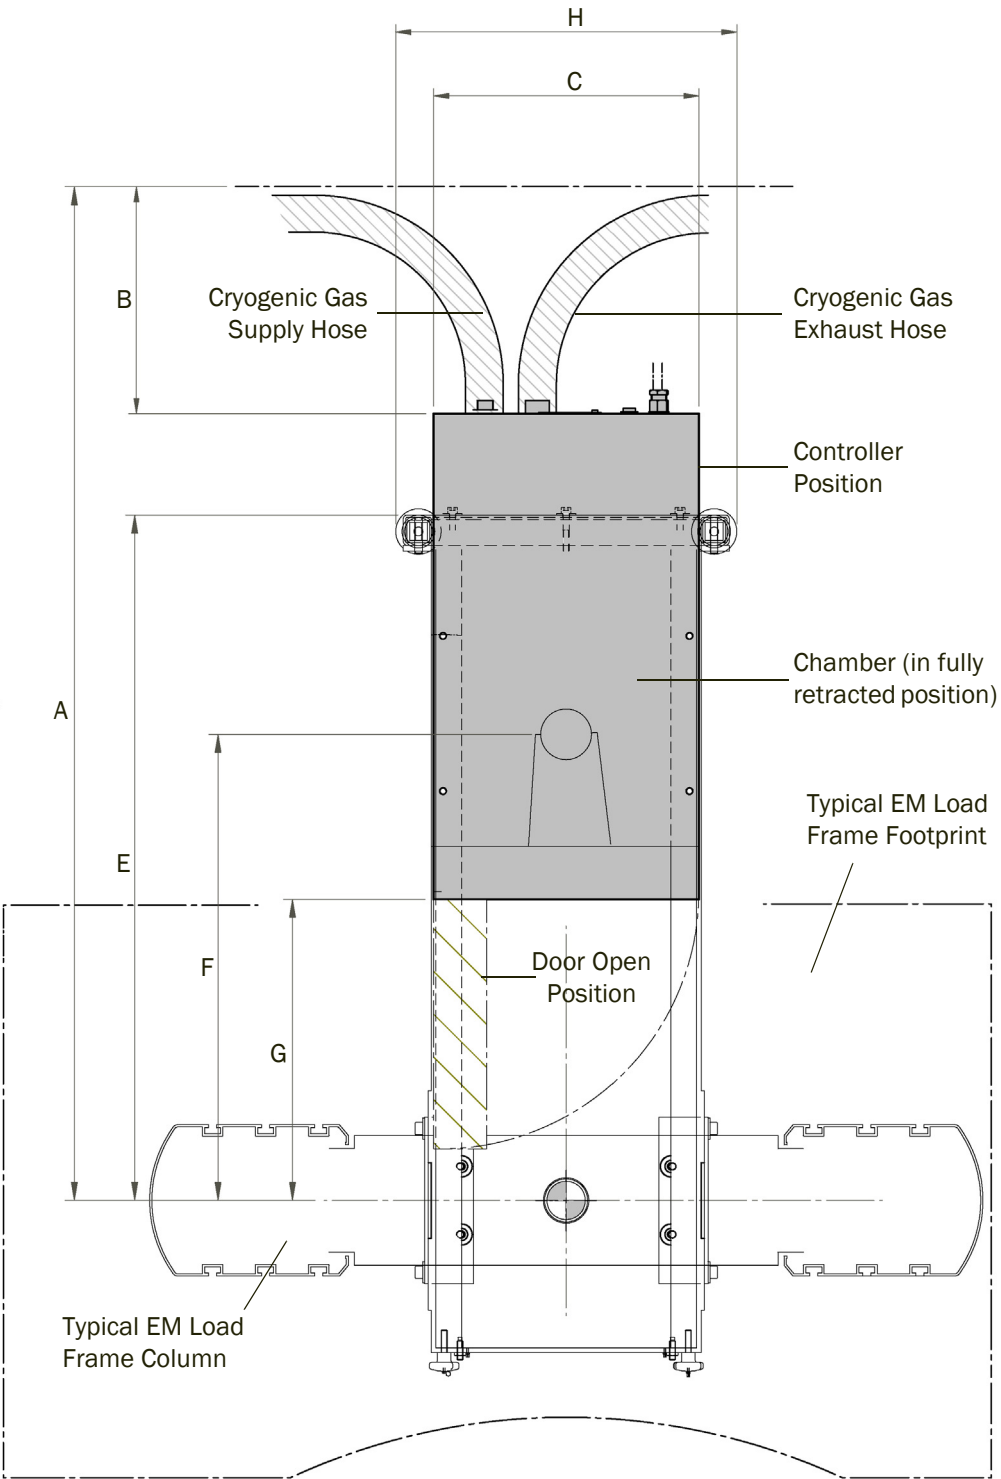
Plan View of Chamber with 3119-230 Roller Mount Assembly
